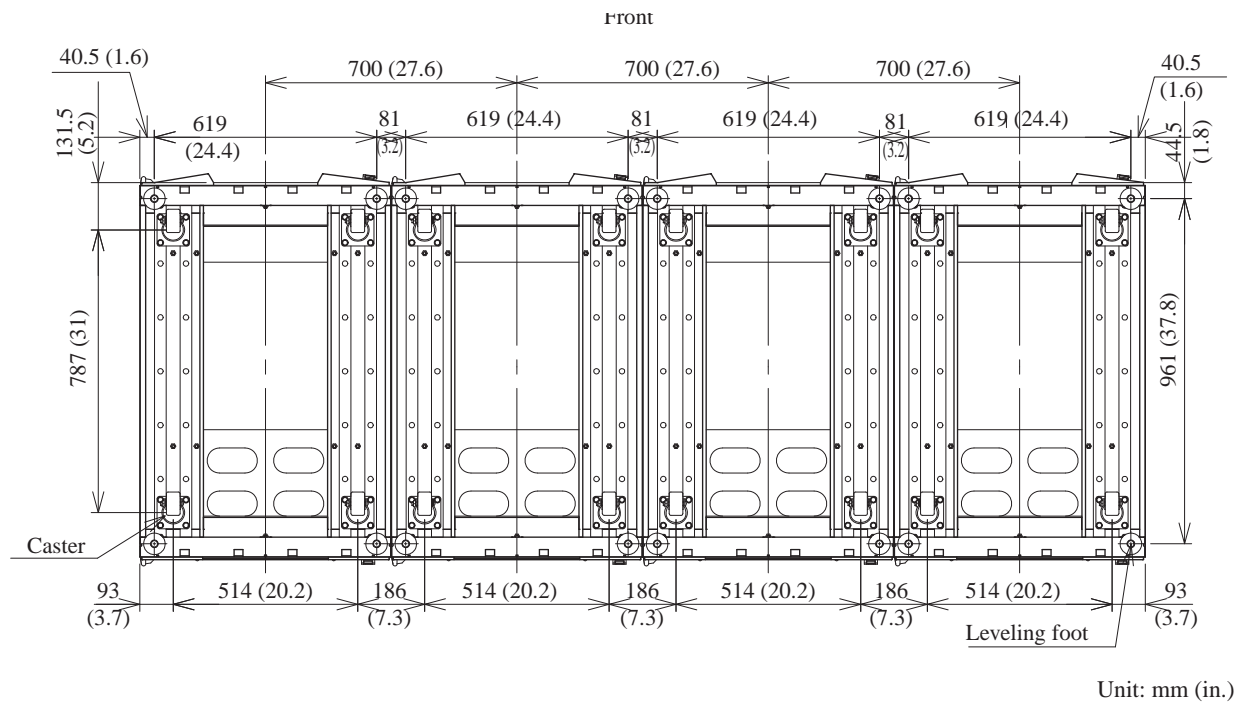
Detailed view of 19-inch rack bottom after connection (slim)
